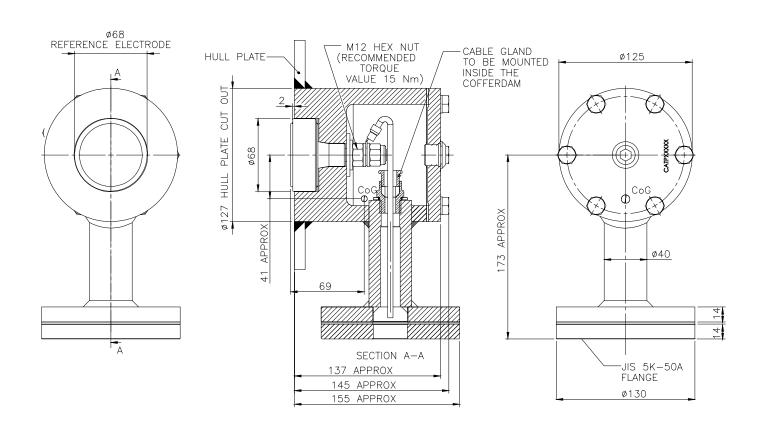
DETAILS OF ANODE MOUNTED IN TO FLANGED COFFERDAM
